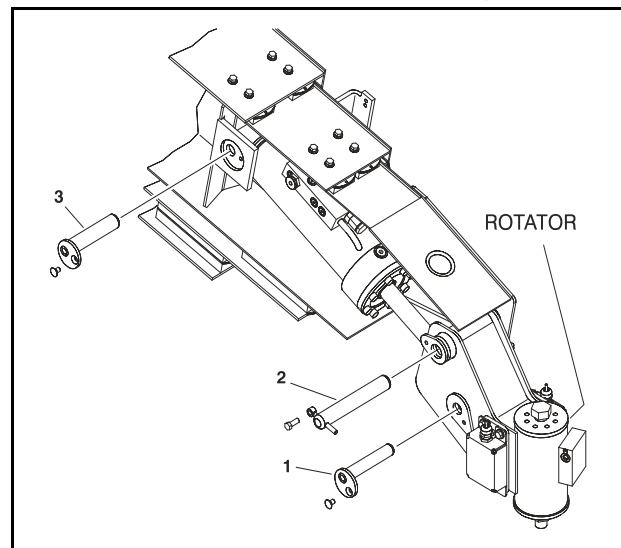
Reassembly of Components-Rotator and Leveling Cylinder
